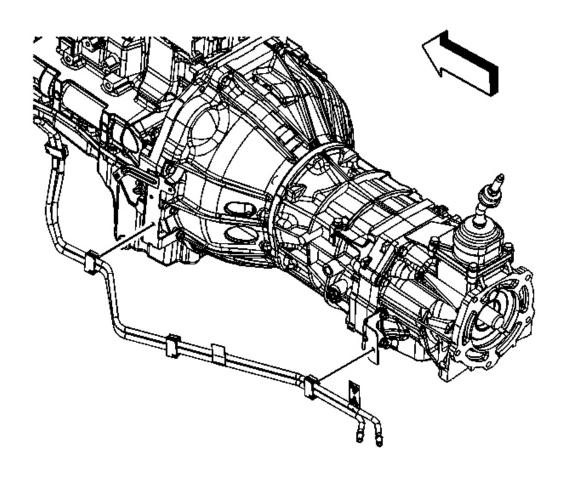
Identifying Clips Attaching Fuel Feed Lines To Transmission Courtesy of GENERAL MOTORS CORP.
